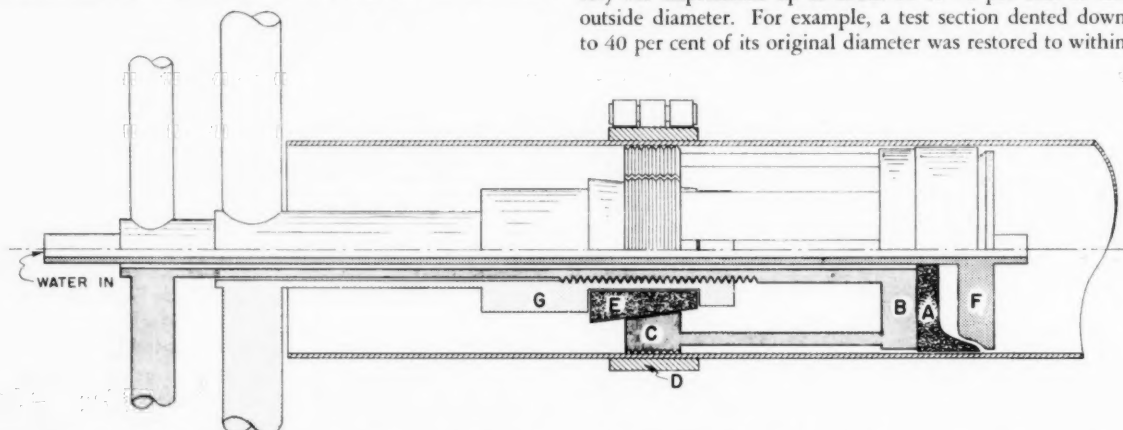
Schematic drawing of plug used to seal the ends of aluminum irrigation pipe so that hydraulic pressure may be applied
